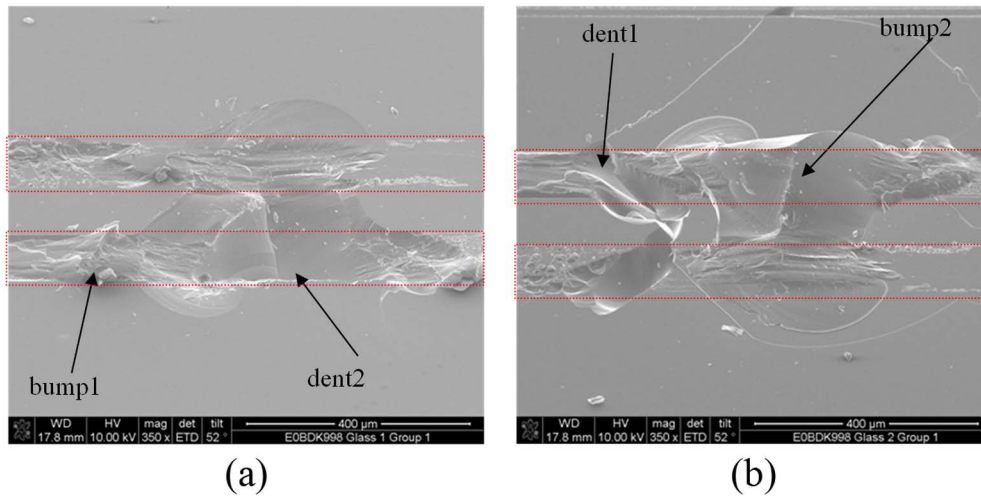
(Color online) SEM tilted angle view of multilayer welding region of fused silica ( $F_{ave} = 26.5 \text{ kJ/cm}^2$ ) after broken apart: (a) the welding surface of the top substrate, and (b) the welding surface of the bottom substrate.
